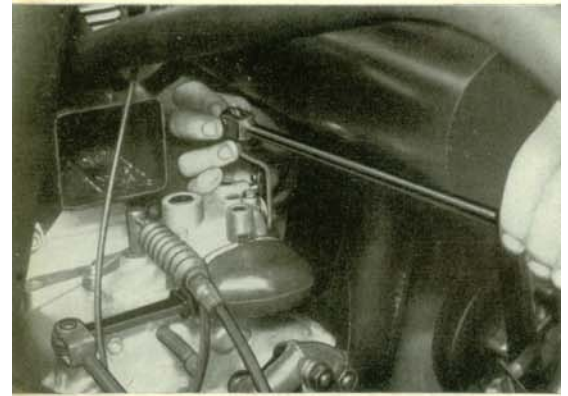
2. Approach gear lever rod to the connecting lever, so that the toggle pin enters smoothly. If this position is not obtained slacken lock nut and rotate toggle (clevis) until the toggle pin fits correctly.
